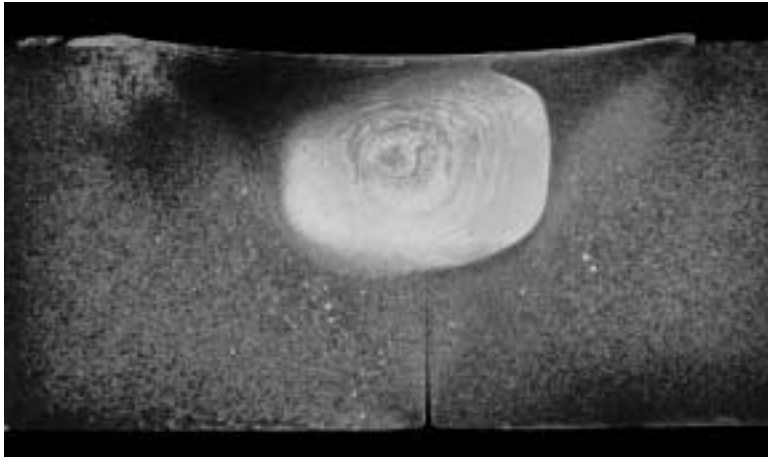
Partial Penetration Butt Weld Joint made in 12.7 mm 6061-T6 (7 mm Penetration)
